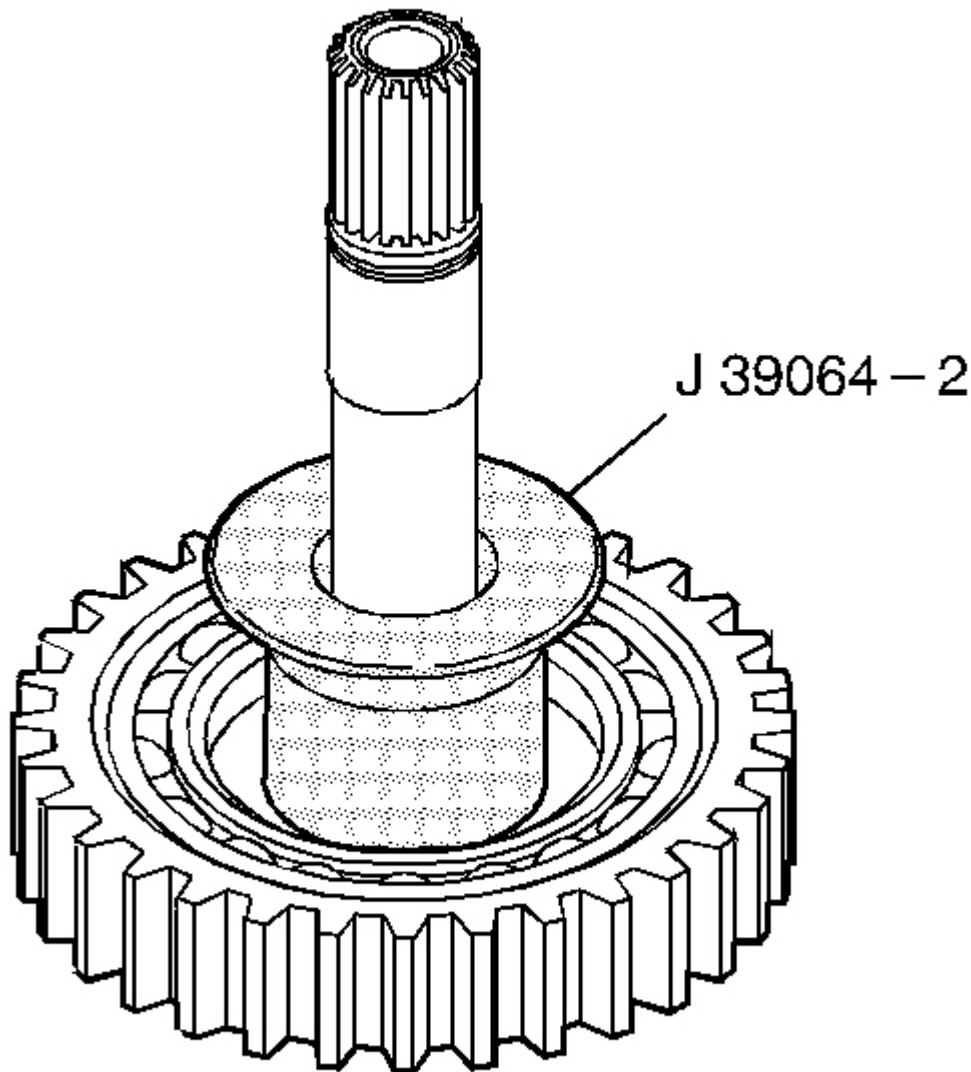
Placing J 39064-2 Over The Drive Sprocket Oil Seal Ring
